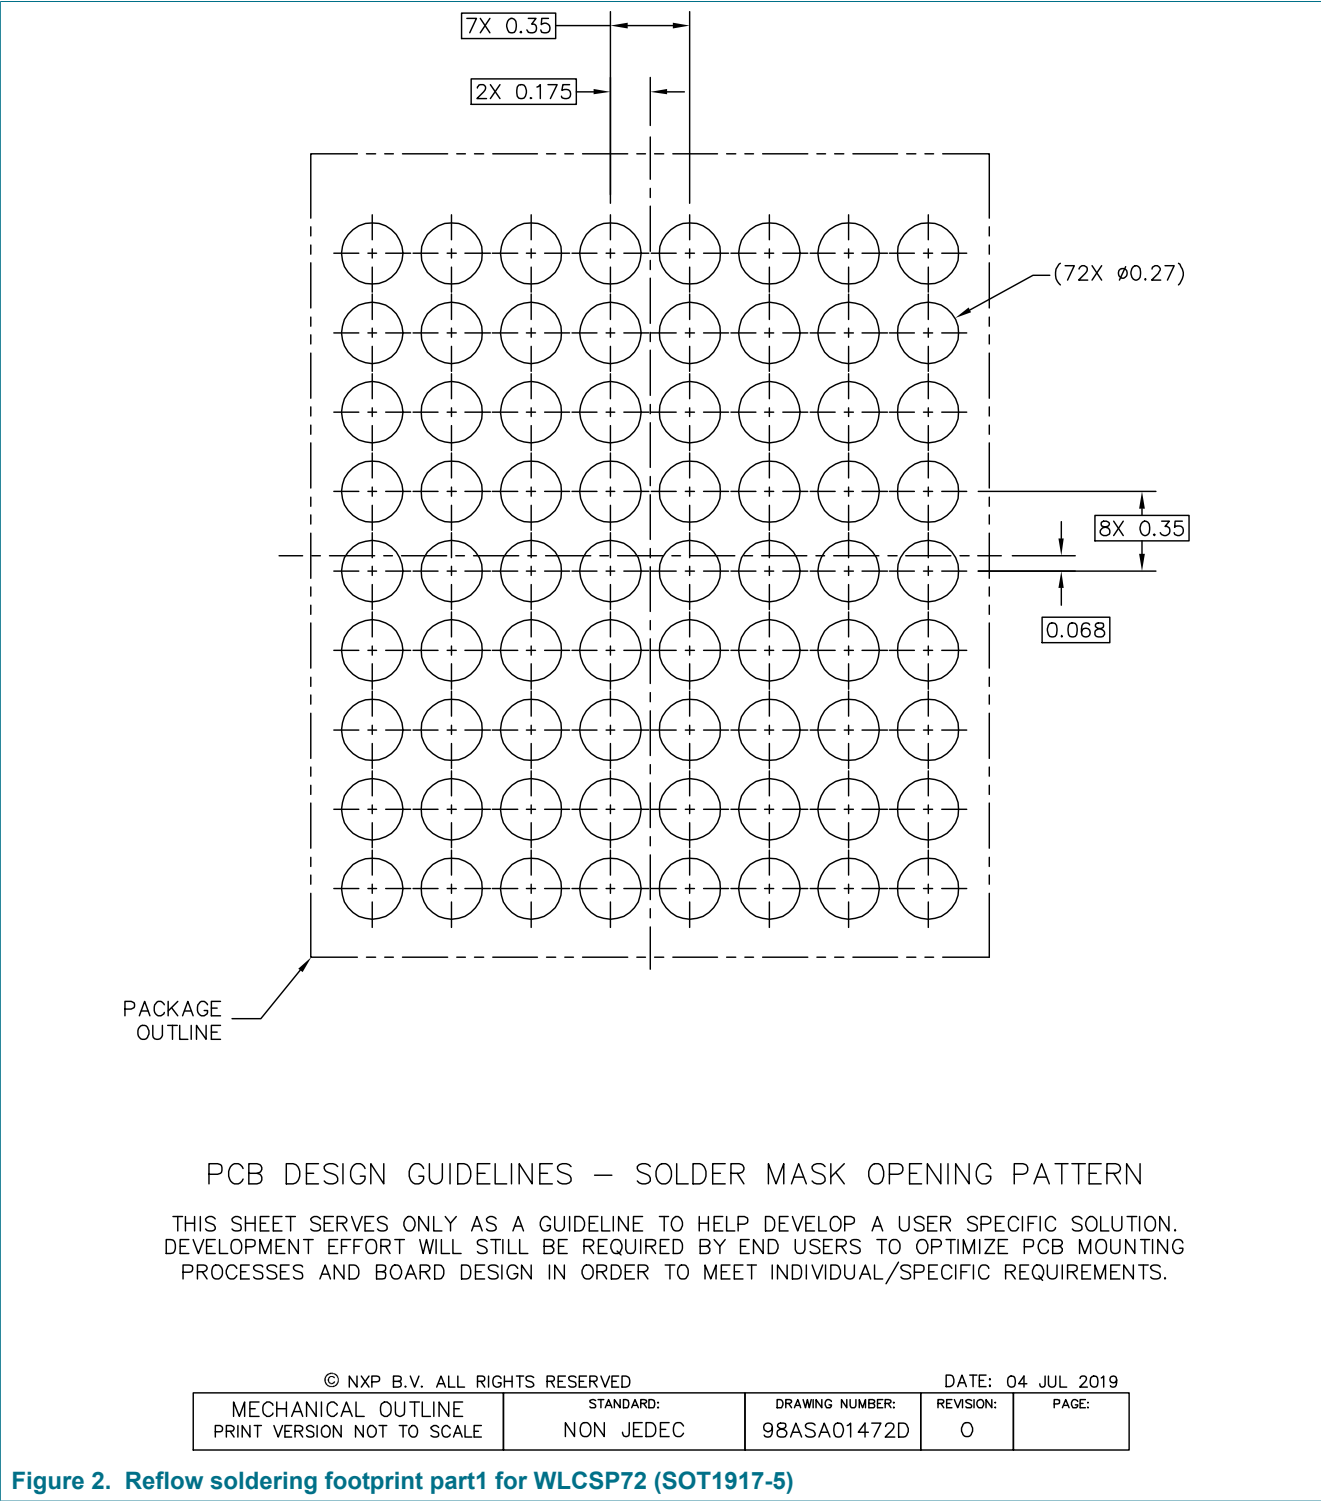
Reflow soldering footprint part1 for WLCSP72 (SOT1917-5)
